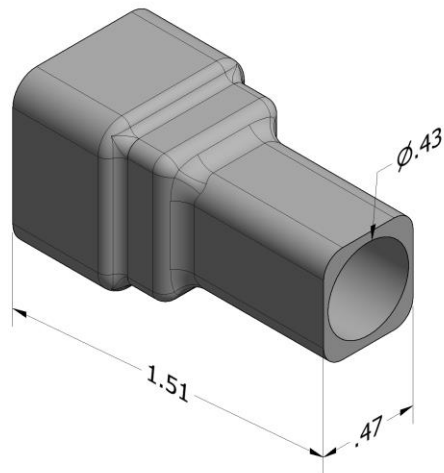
Mark 1 cap for solenoid housing for MSBS testing. Dimensions in inches.
